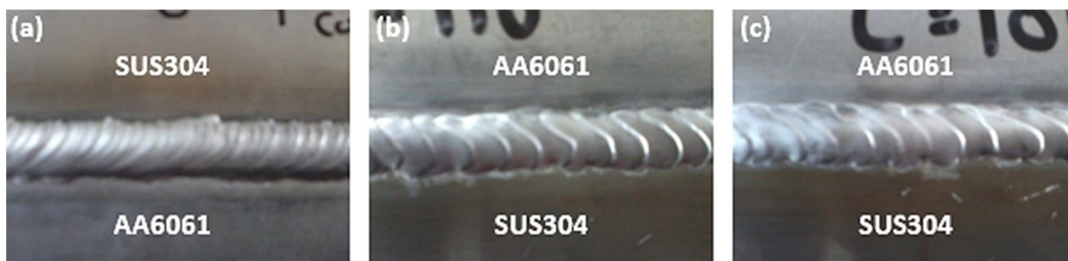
Surface appearance of the welded specimens for (a) 90 °C (sample 2), (b) 180 °C (sample 4) and (c) 270 °C (sample 9).
